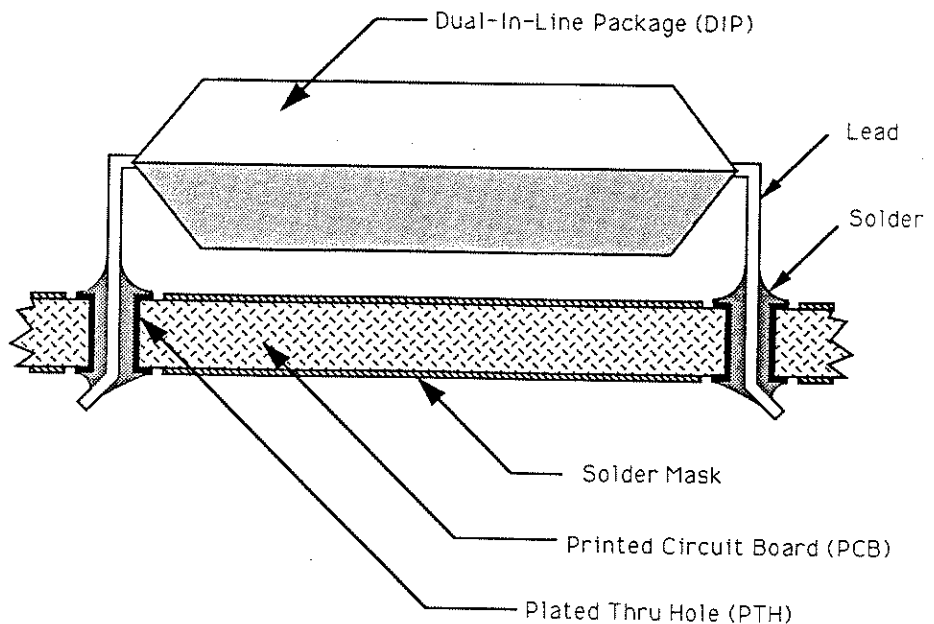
Dual-in-line package on printed circuit board, c. 1970.
